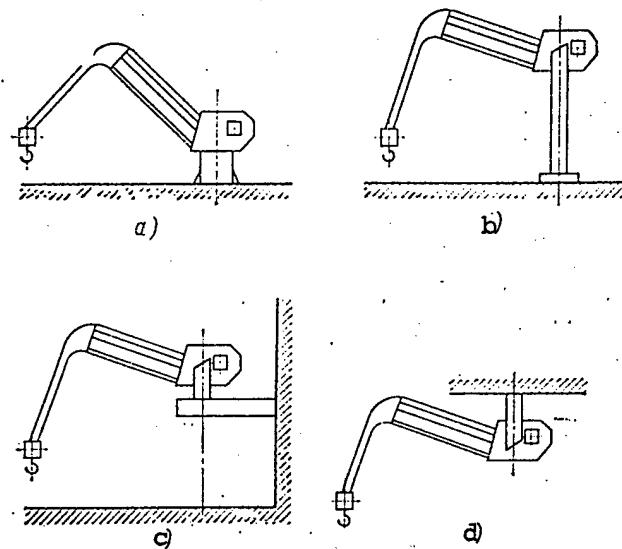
Versions of MP-100 Loading Manipulator: a--installation on floor on base; b--installation on floor on column; c--attachment to wall on bracket; d--attachment to ceiling
